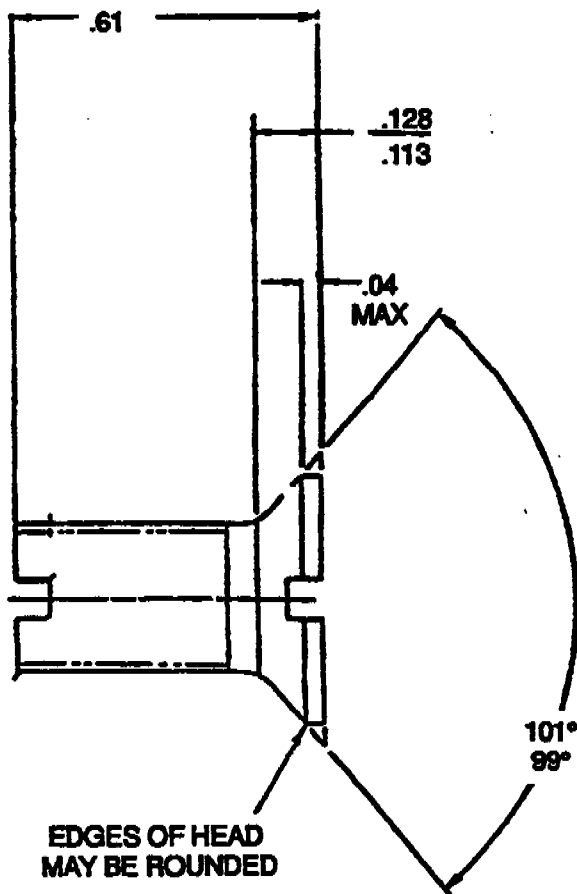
Bleed Band Screw, P/N 1-160-265-01.
